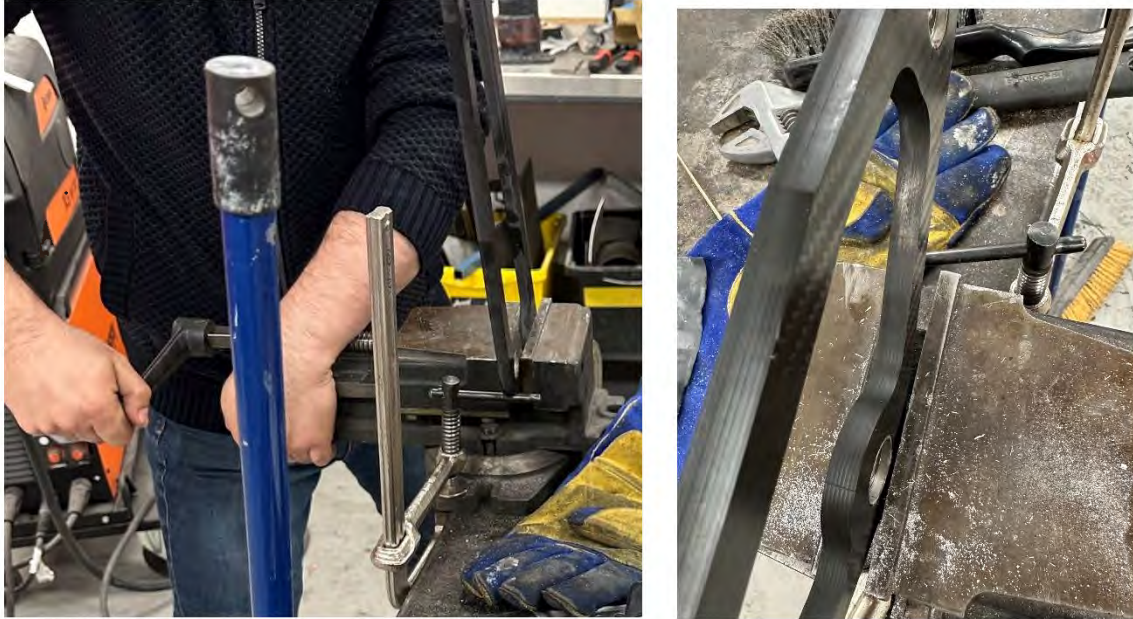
Pressing of metal sleeves and ball bearings to the different components of the exoskeleton.
